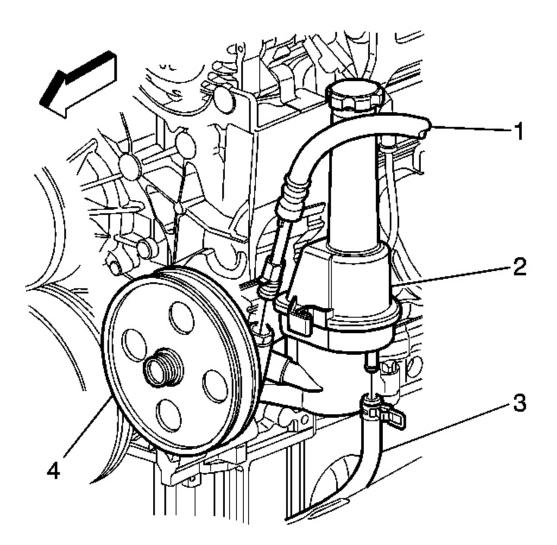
View Of Power Steering Pressure Hose, Return Hose & Pump Courtesy of GENERAL MOTORS CORP.
